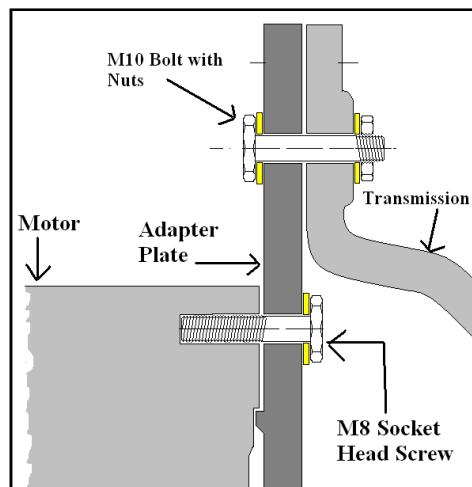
Figure showing how the bolts secure the adapter plate with the motor and transmission.
